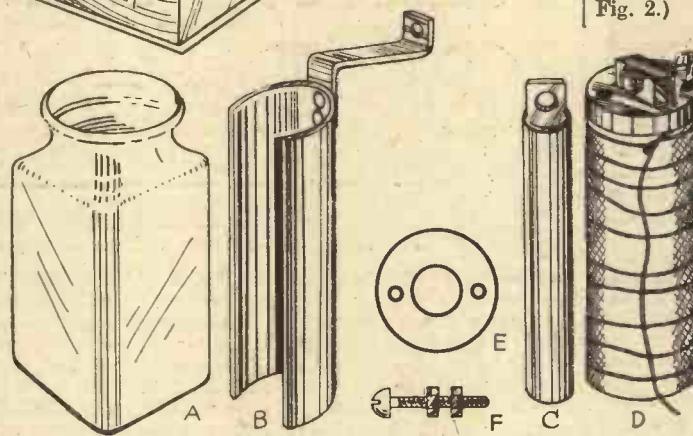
(a) outer cell; (b) zinc element; (c) carbon rod; (d) sac assembly; (e) top disc; (f) terminal.
